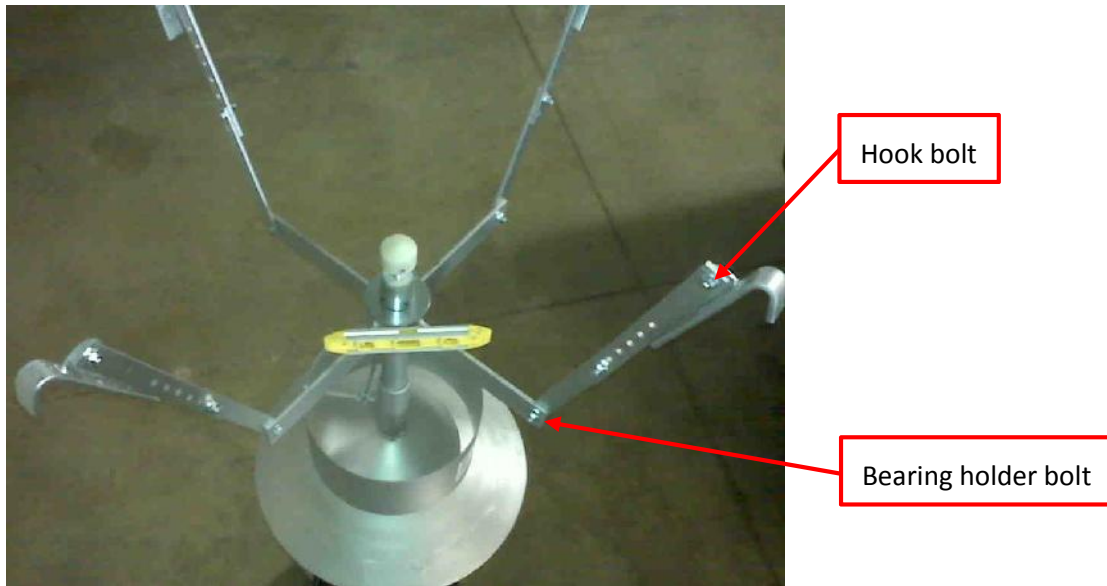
LEVEL ACROSS THE BEARING HOLDER
